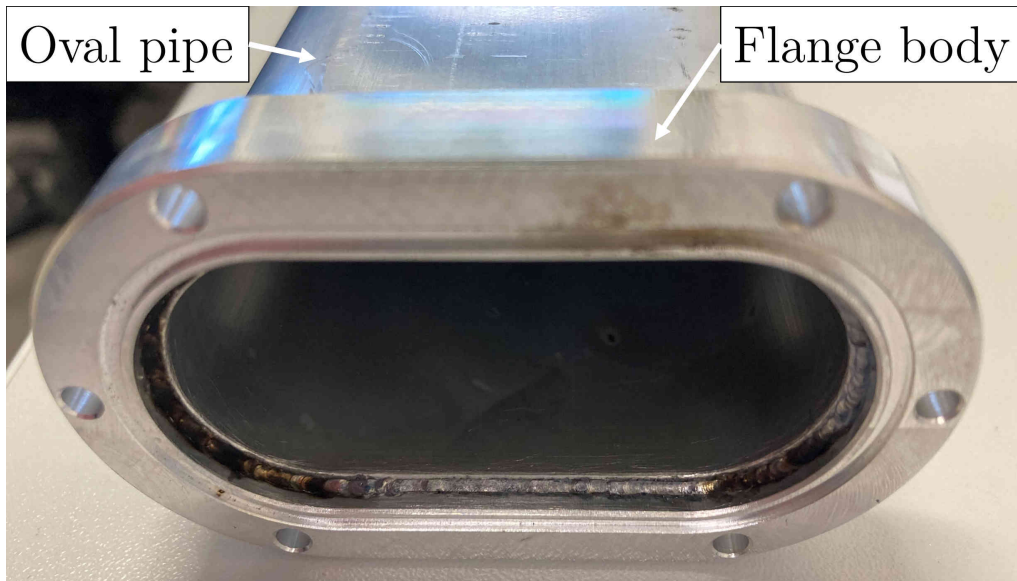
Oval flange body with sealing groove and through bores for bolts, welded to oval pipe.
